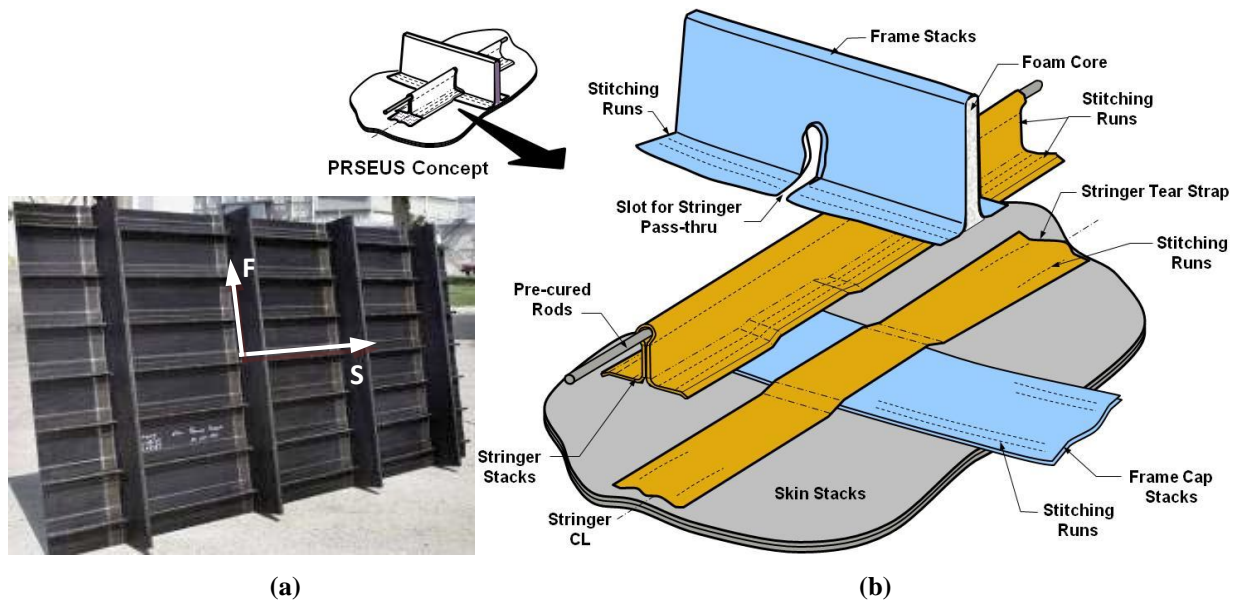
PRSEUS: (a) sample flat panel and (b) general assembly concept.
